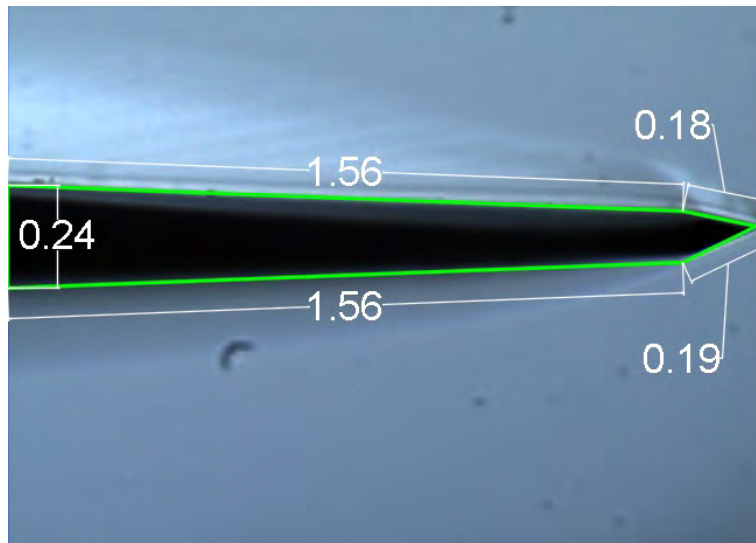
Sharp edge dimensions of the circular blade. Units in mm. Not to scale.
